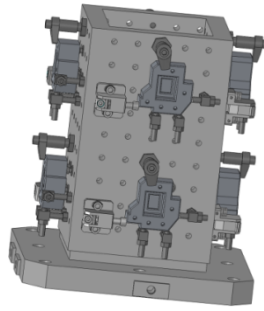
Modular fixture, four sided tooling block, with four identical patterns
